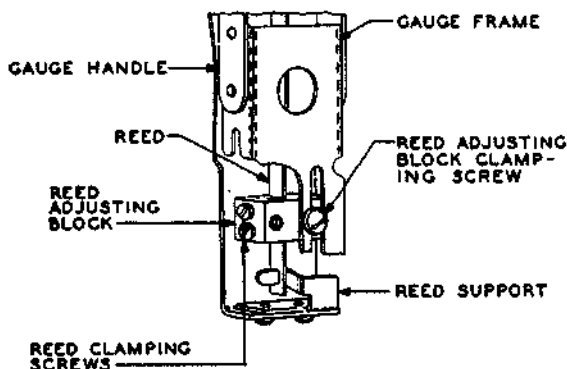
Designation of Parts of Nos. 68B, 68C, 68D, 70D, 70E, 70F, 70G, 70H, and 70J Gauges
